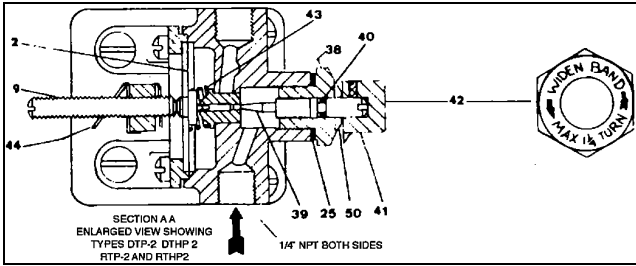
Body assembly RTP - DTP Types, showing adjustable proportional band mechanism
